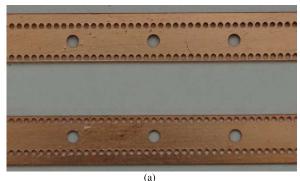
Solder paste deposition on the central layer and screw alignment on a Ka-band filter made with ESIW technology.
